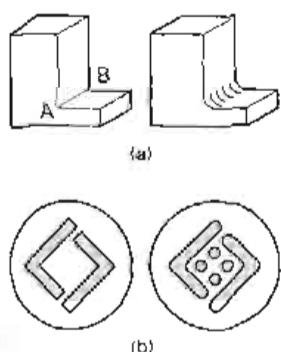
(a) Shape containing nonuniform sections and a sharp interior corner that may crack during quenching. This is improved by using a large radius to join the sections. (b) Original design containing sharp corner holes, which can be further modified to produce more uniform sections.
